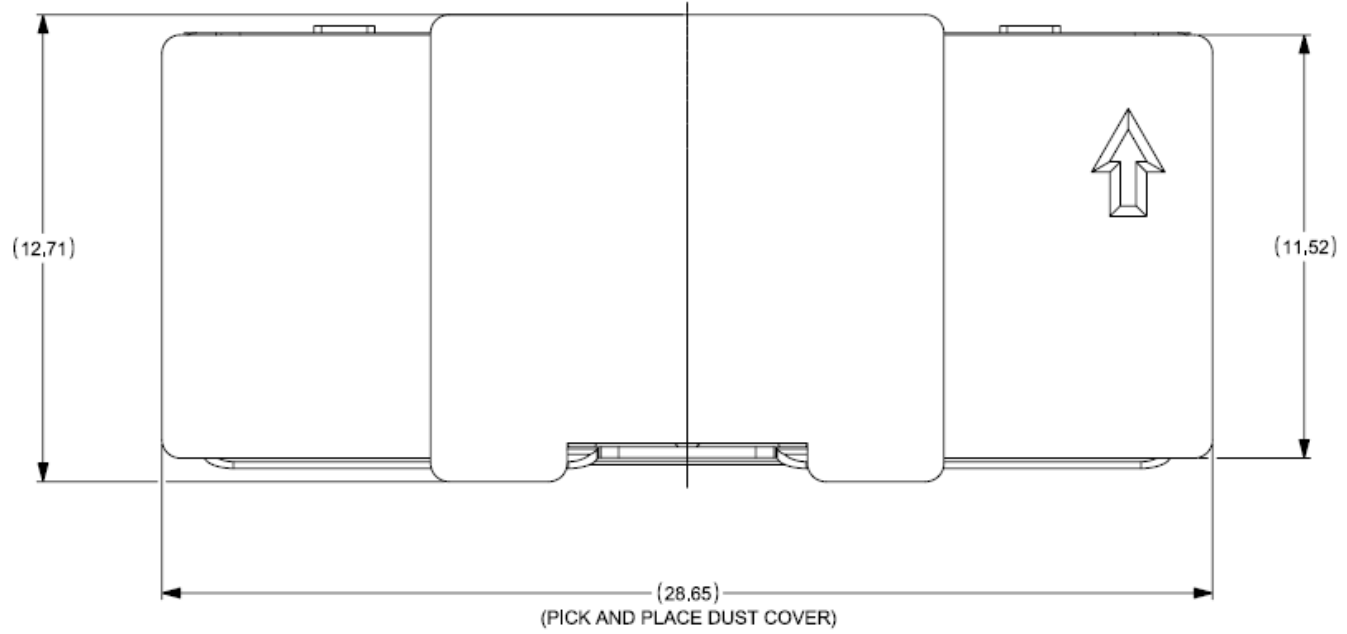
72-Pin Top View of Fixed-Side Connector with Dust Cover
